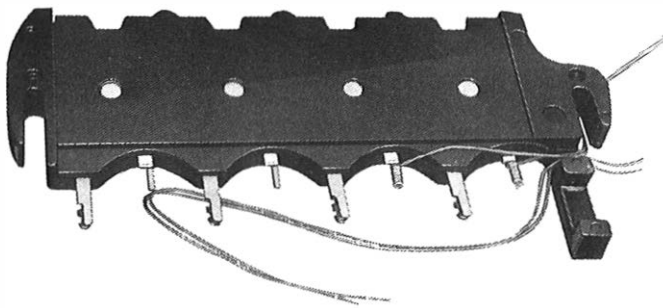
Segment of fuse mounting with wire-wrapped connexions
